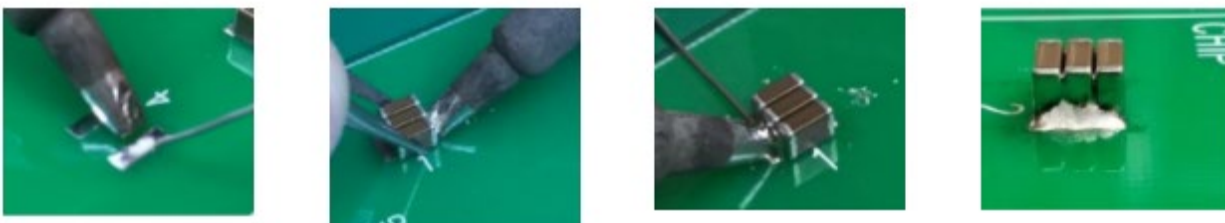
Manual Attachment of KONNEKT using Soldering Iron and Flux Core Wire
